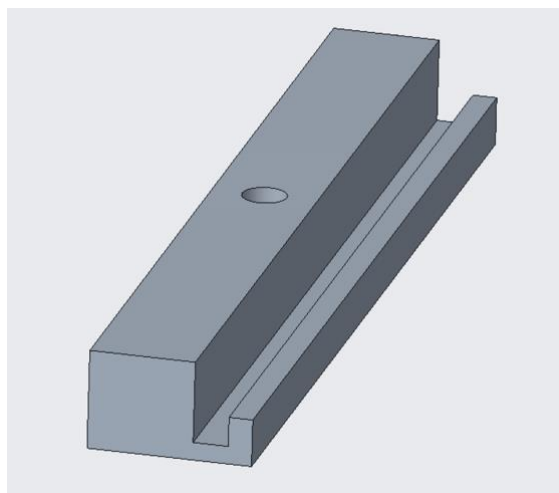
CAD Model of Fixturing Part for Instron Tensile Testing
